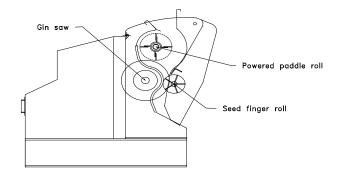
Schematic drawing of the powered paddle roll gin stand showing the reshaped roll box and the rotating seed finger roll.
